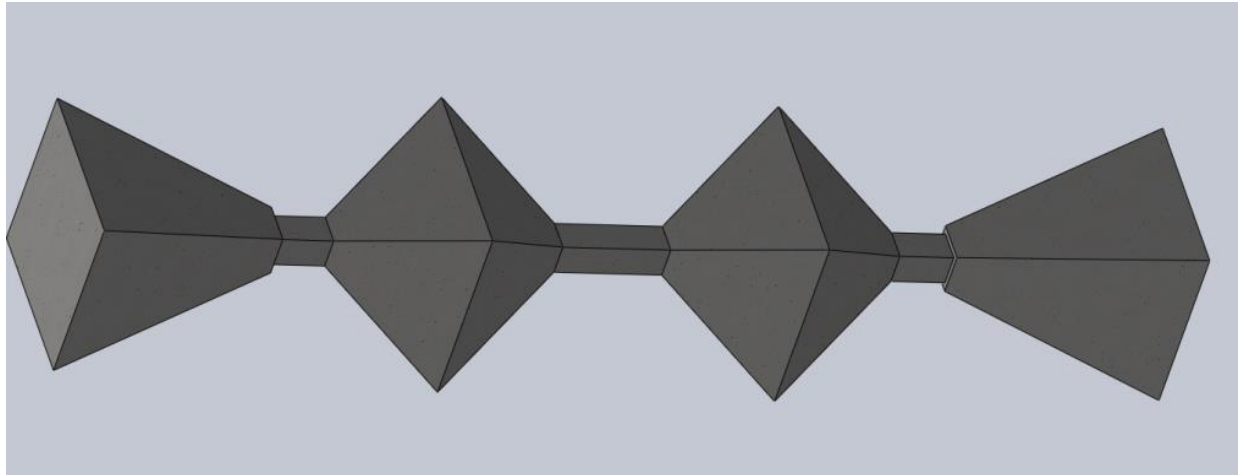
3D CAD representation of the part containing two 18/11 octahedral cells to be manufactured on our 4-axis CNC mill. Roland mill in the Earth Sciences Machine Shop.
